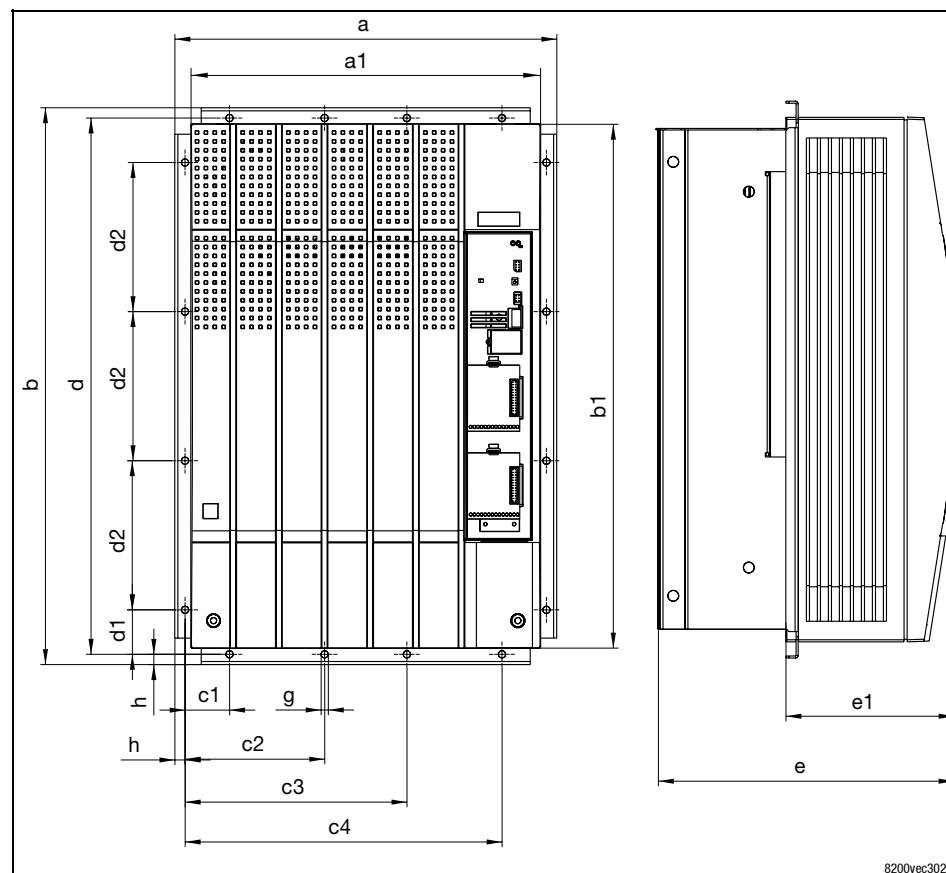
Dimensions for thermally separated mounting 45 ... 55 kW
